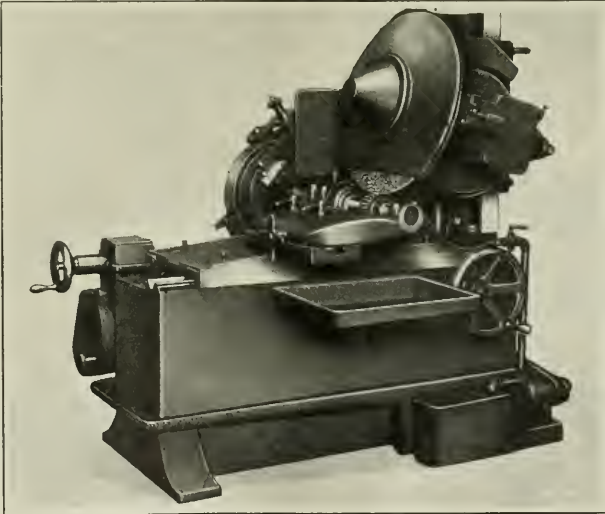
Gear-tooth Grinding Machine developed by the Lees-Bradner Co.
